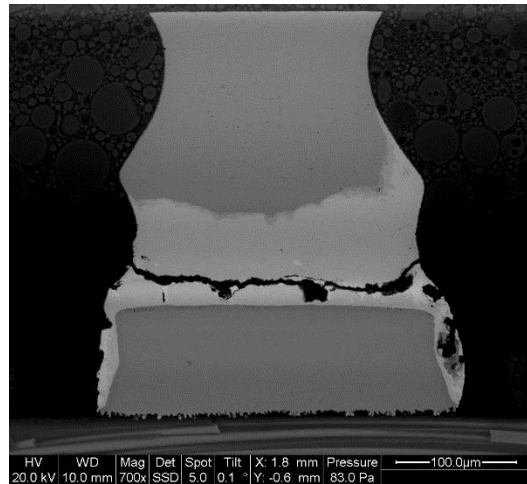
shows failed SAC305 solder joints in QFN44 and R2512 packages. Figure 10-19 (a) and Figure 10-19 (b) show failed QFN44 in mechanical shock after 1000 hours of aging at 200°C. Both failed solder joints confirm that failure occurred at the interface between  $\text{Cu}_6\text{Sn}_5$  interfacial IMC and the bulk solder. This type of failure mode was consistent for all failed SAC305 solder joint in QFNs. The voids developed during high temperature thermal aging at the interface between  $\text{Cu}_6\text{Sn}_5$  interfacial IMC and the bulk solder reduced the interfacial strength. During mechanical shock, a crack developed at high stress concentration region. This crack propagated through a weak interface connecting interfacial voids and caused complete separation between the component side interfacial IMC and the bulk solder.
